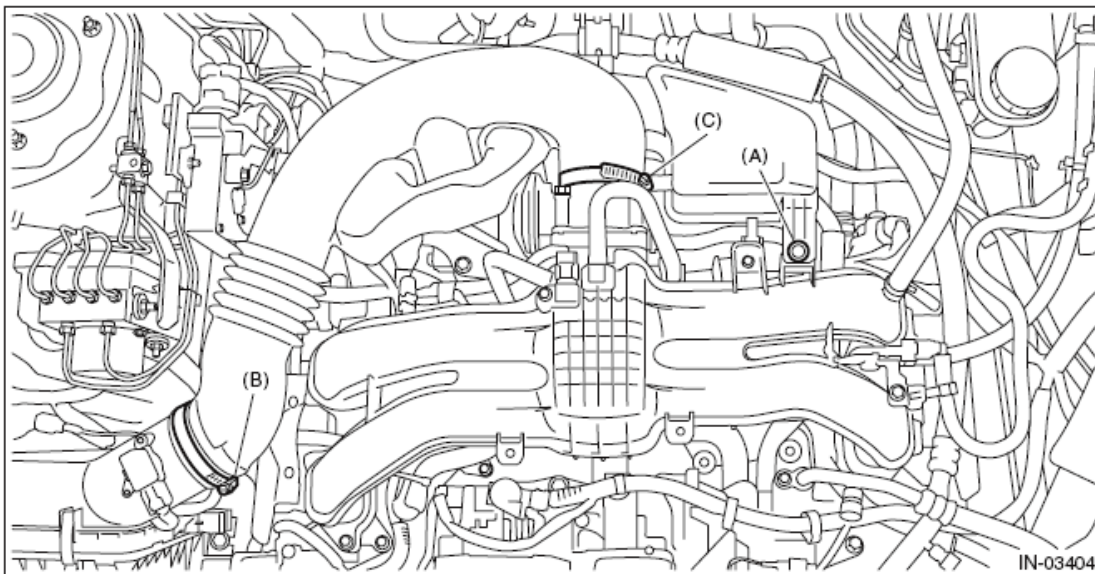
Identifying Air Intake Boot, Air Cleaner Case And Throttle Body To Air Intake Boot Clamp
